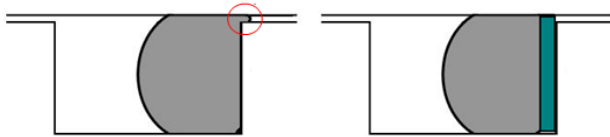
O-ring extrusion (left) and how it can be avoided with the use of back up rings (right)
